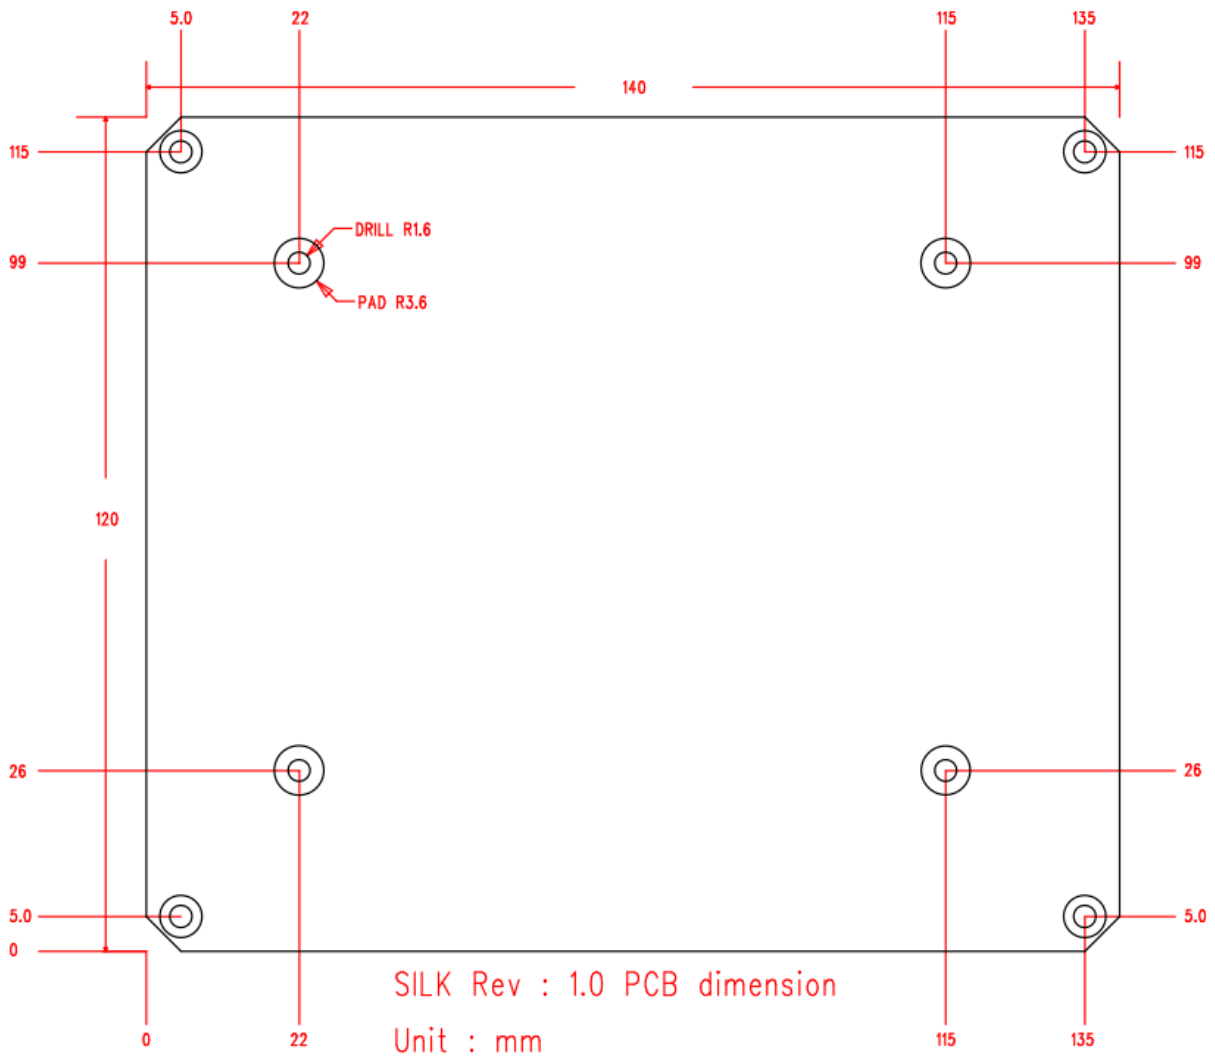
External Dimensions and Hole Locations of the YR8A77450S000BE Board (Top View)
